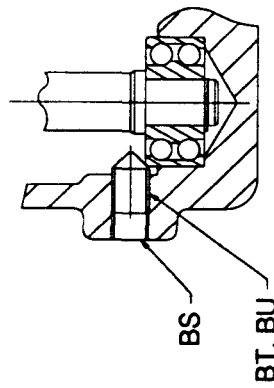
maxRoy Drive Assembly Parts Reference Drawing.
